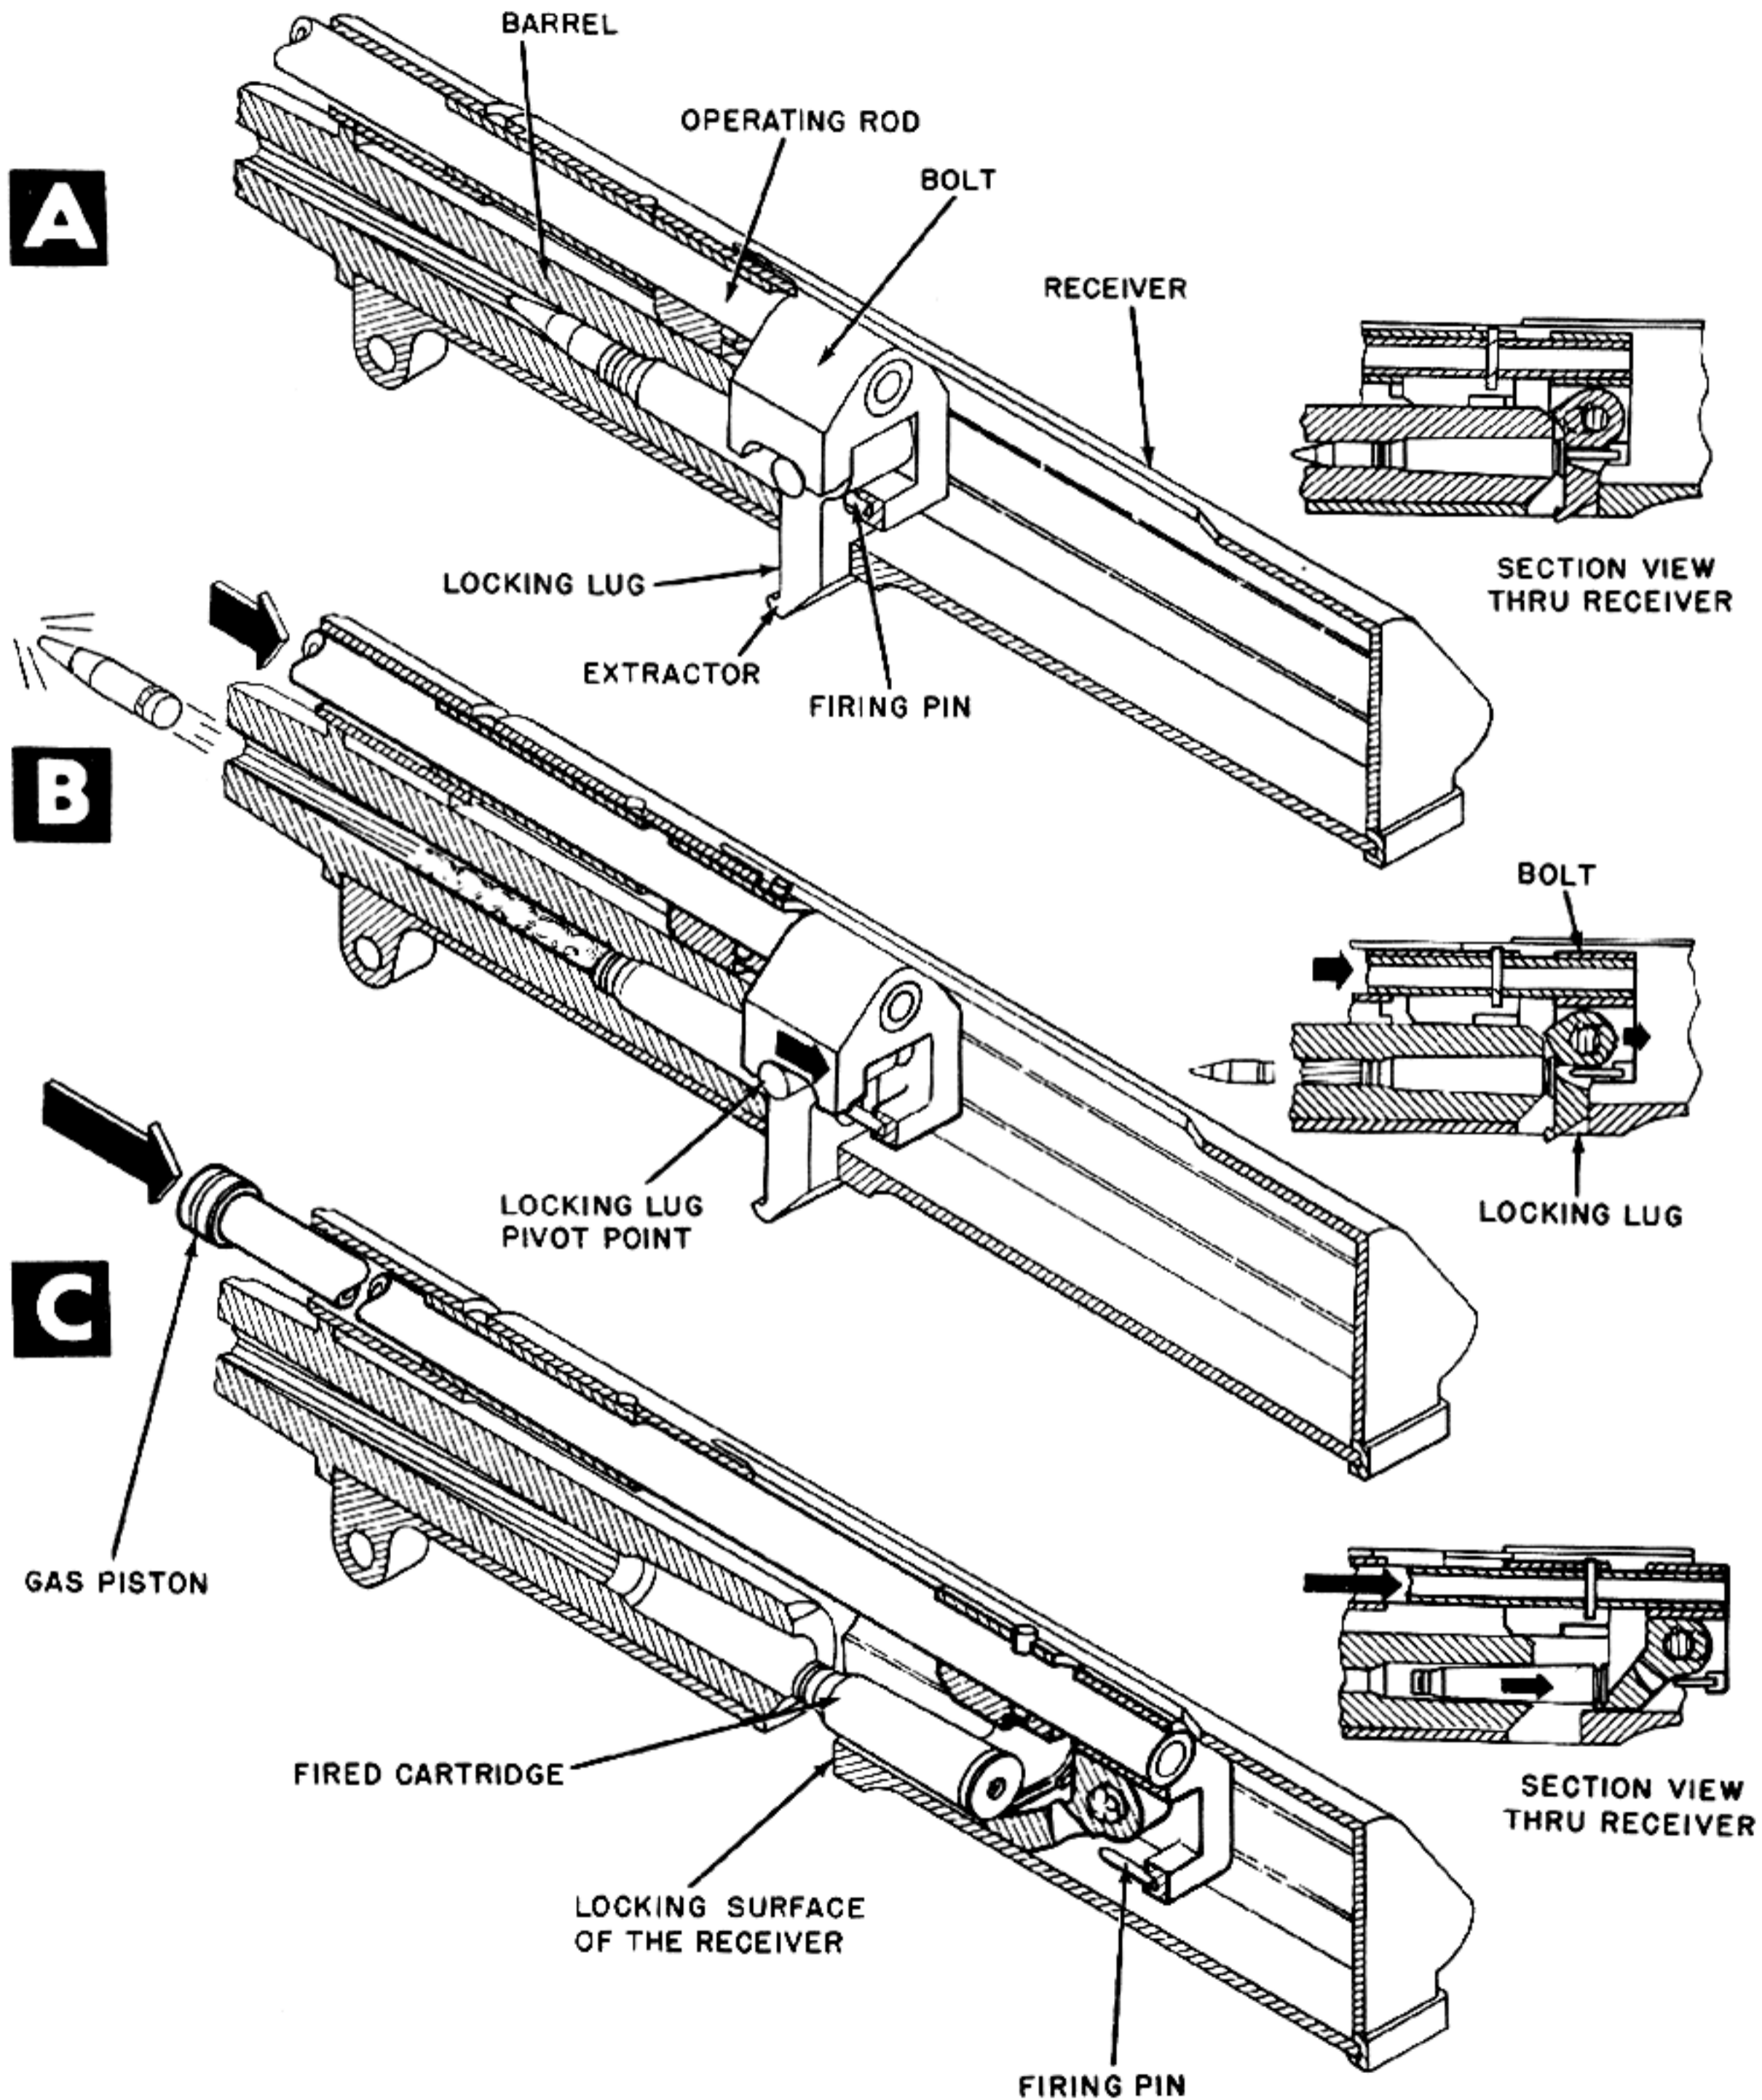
Operating Rod Rotates Locking Lug Free of Locking Surface.
